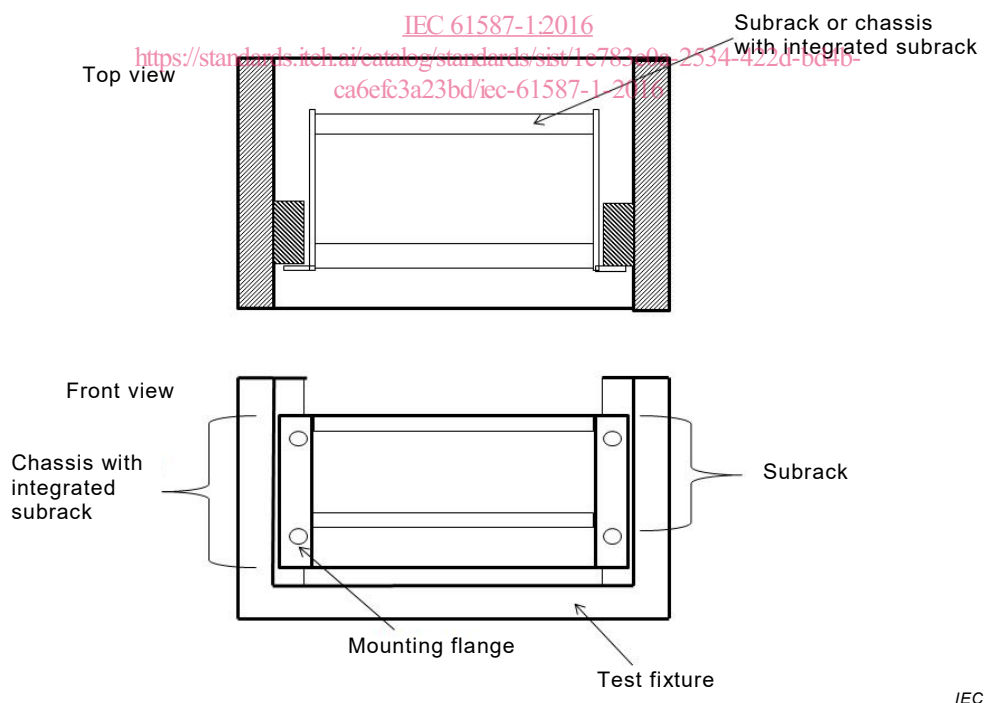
Static mechanical load test fixture for a subrack or a chassis with an integrated subrack
